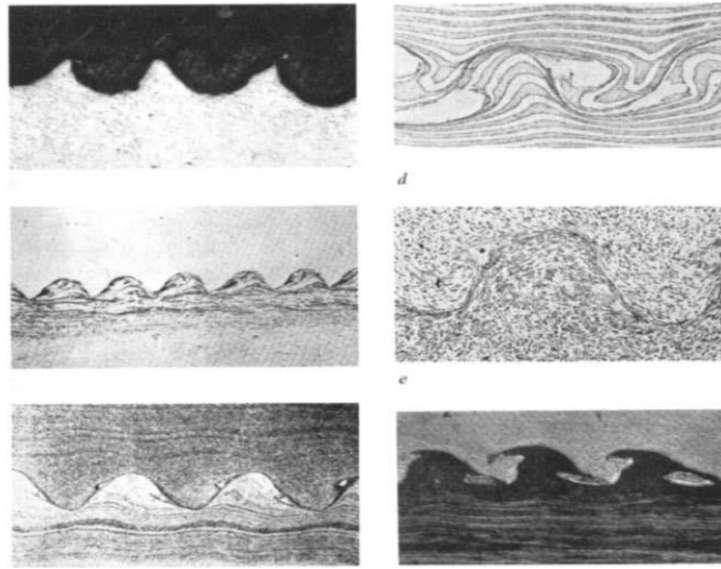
Explosion-weld interfaces that are typical (100 x). (a) Mild steel and lead explosive welding (top of photograph); (b) Stainless steel explosion welded to columbium (top of photograph); (c) 4130 steel explosion welded to 4130 steel; (d) explosion welded interface of a sample made of alternate layers of Copper and Nickel Electroplate (each square is 0.0005 in. x 0.0005 in.); (e) explosion welded 1018 steel to 1018 steel; and (f) explosion welded Ni to Cu[191].
